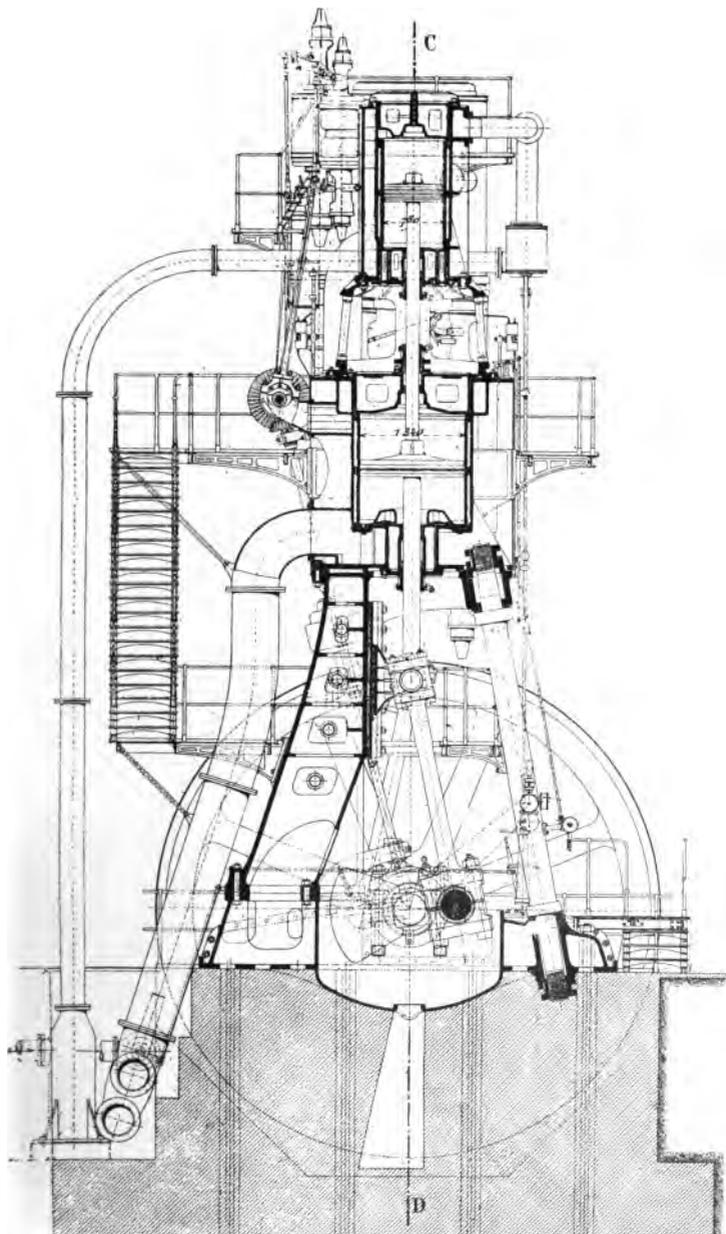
END SECTIONAL VIEW OF TRIPLE-EXPANSION FOUR-CYLINDER “ BORSIG ” ENGINE, DEVELOPING 2,500 H.P.
